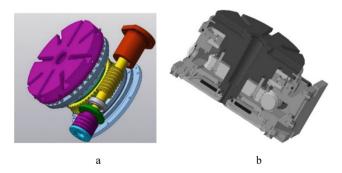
A three-dimensional model of a rotary table with a faceplate: a - general view without housing; b - the cross-section.
